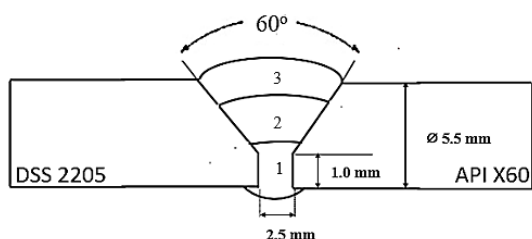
Schematics of weld joint design and welding sequence
